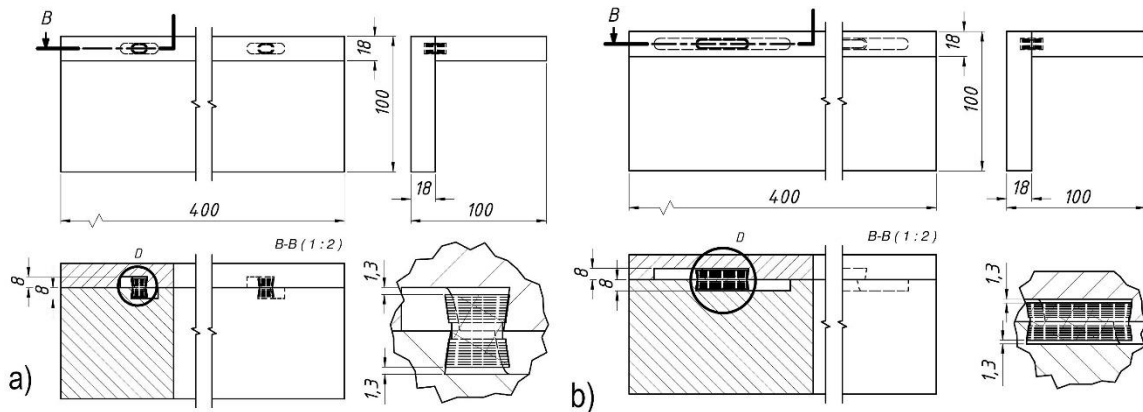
Joints with fasteners of lengths: a) 4 mm, b) 30 mm
